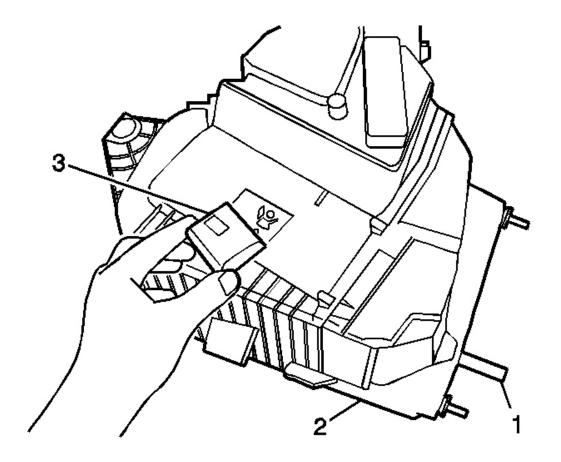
Removing/Installing Blower Motor Control Processor - Auxiliary Courtesy of GENERAL MOTORS CORP.
